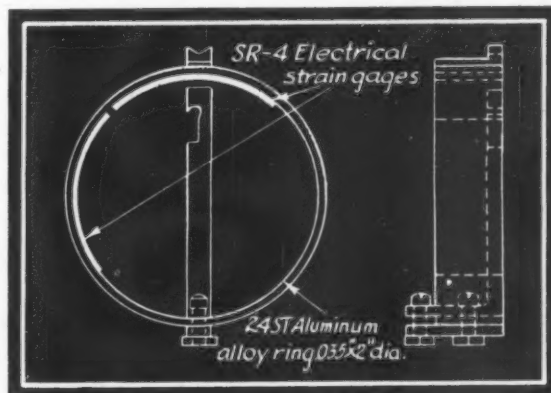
Above—Special gage is shown mounted on a spotweld specimen for recording extension between two spotwelds
